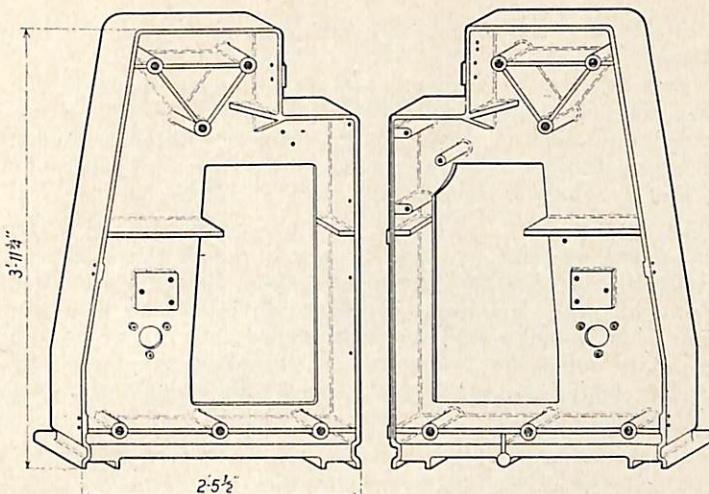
Examples of Workpieces on which important Savings have been made by the use of the B.T.H. System on the Kearns Machine
